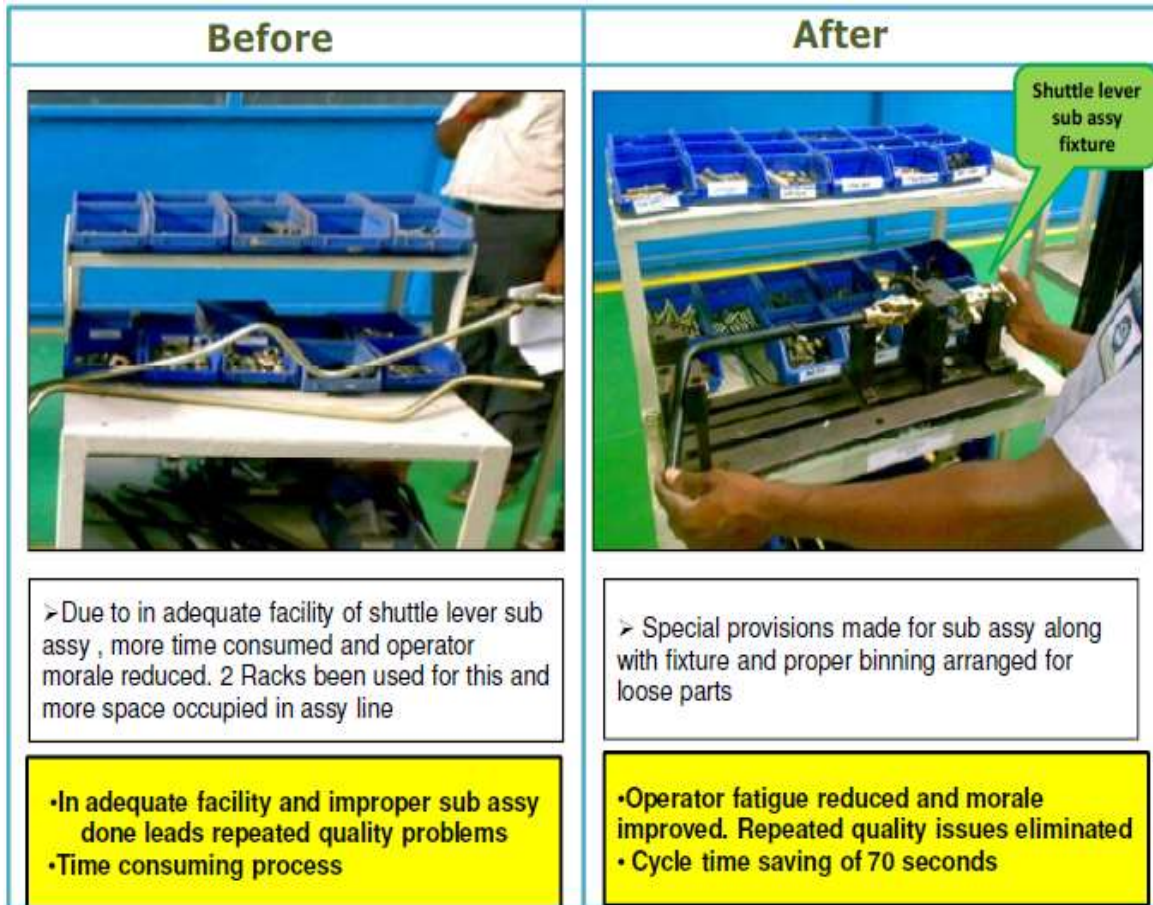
Cell 5- Stage 1 – Shuttle lever Sub Assembly Fixture
